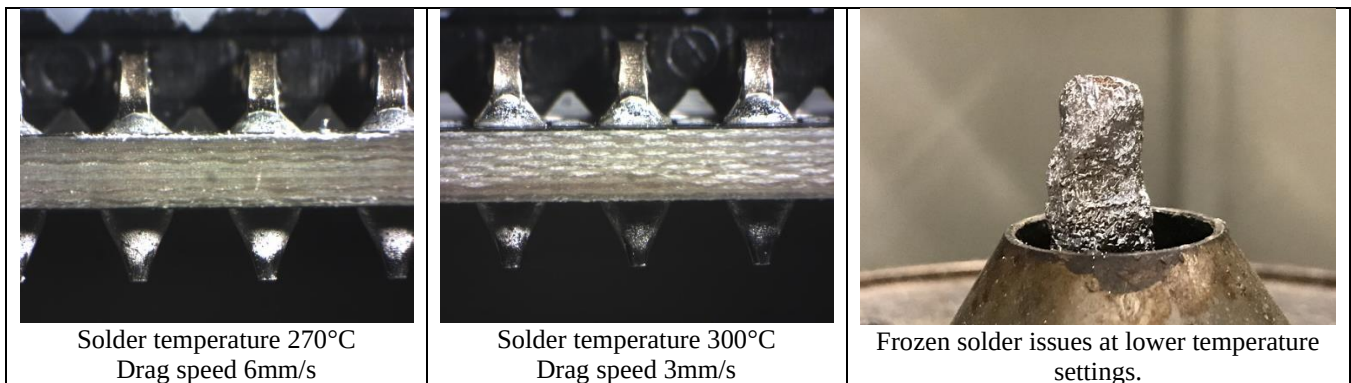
The soldering of Alloy E is excellent for board 1 great wetting give nice meniscus of solder.
